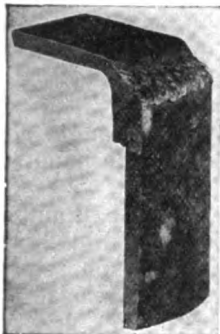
D. FLANGED HEAD BACKED INTO SHELL.
